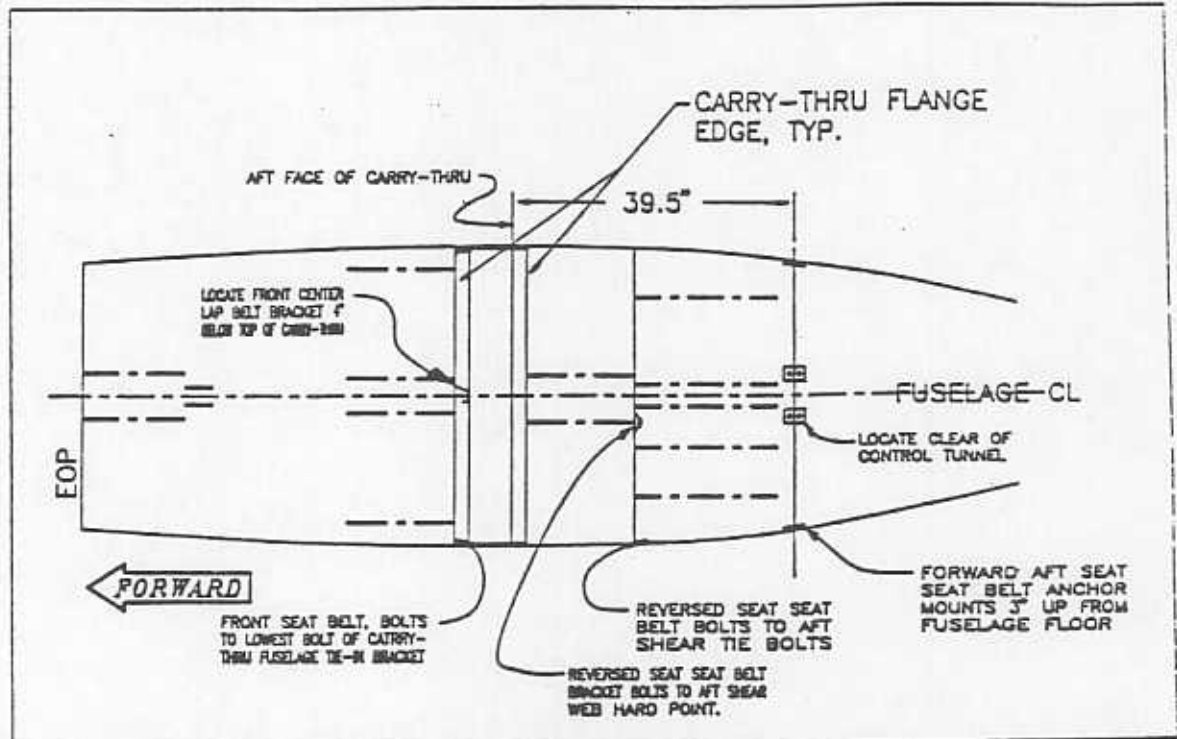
LAP BELT ANCHOR LOCATIONS
